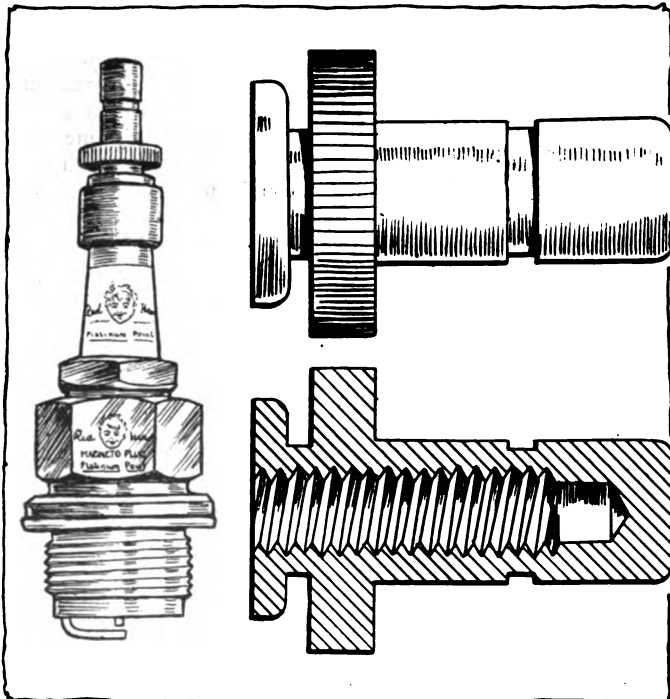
New design of Red-Head spark-plug. Fig. 3—Enlarged view of Red-Head special terminal cap
